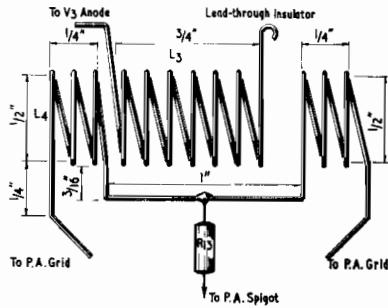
Dimensions of the tripler anode and P.A. grid coils. The wire used is 18 s.w.g. tinned copper
